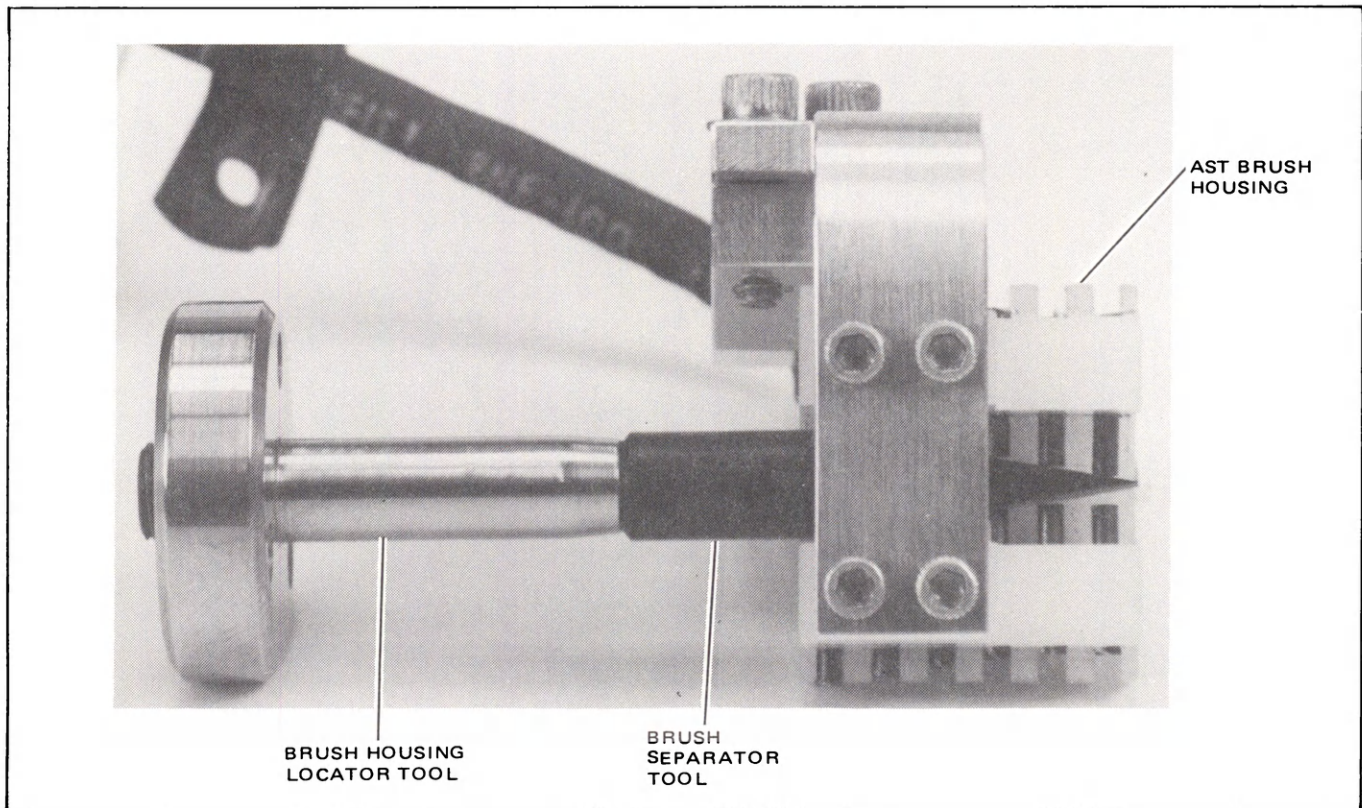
Separating the Brushes – Tool Partially Inserted
